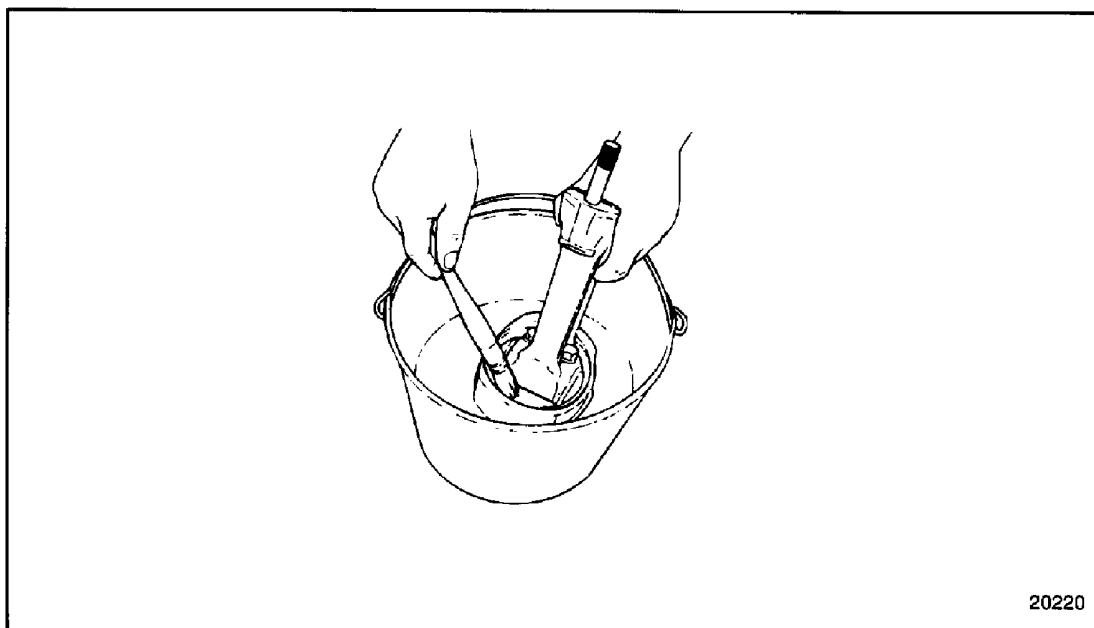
Piston and Connecting Rod Assembly Lubrication
